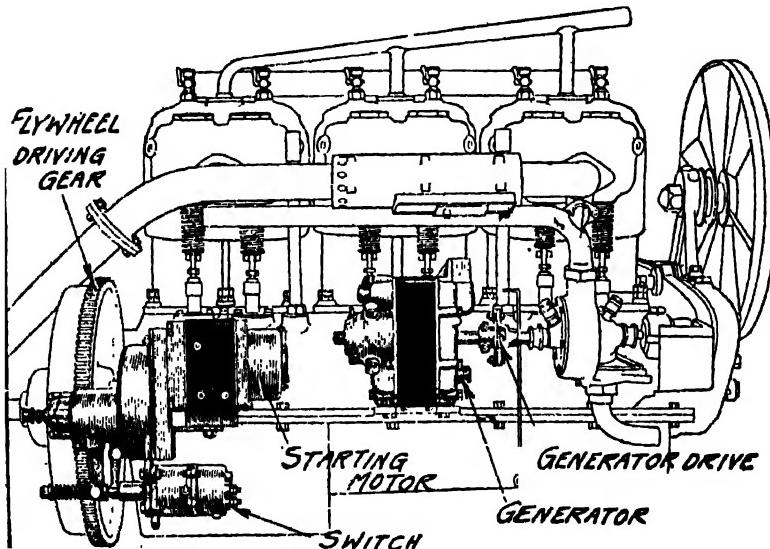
Method of Attaching Starting Motor and Generator of Typical Three Unit System on Six Cylinder Engine.
